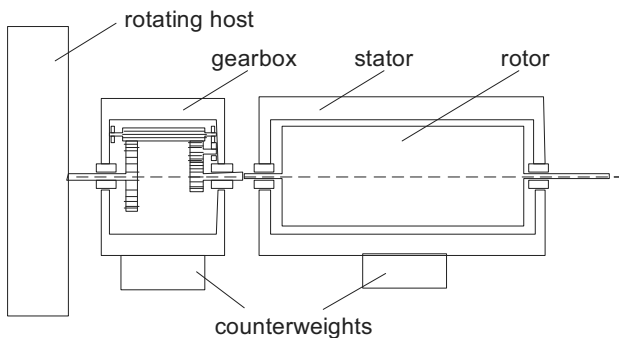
Schematic description of a gearbox attachment between the rotation source and rotational generator.
